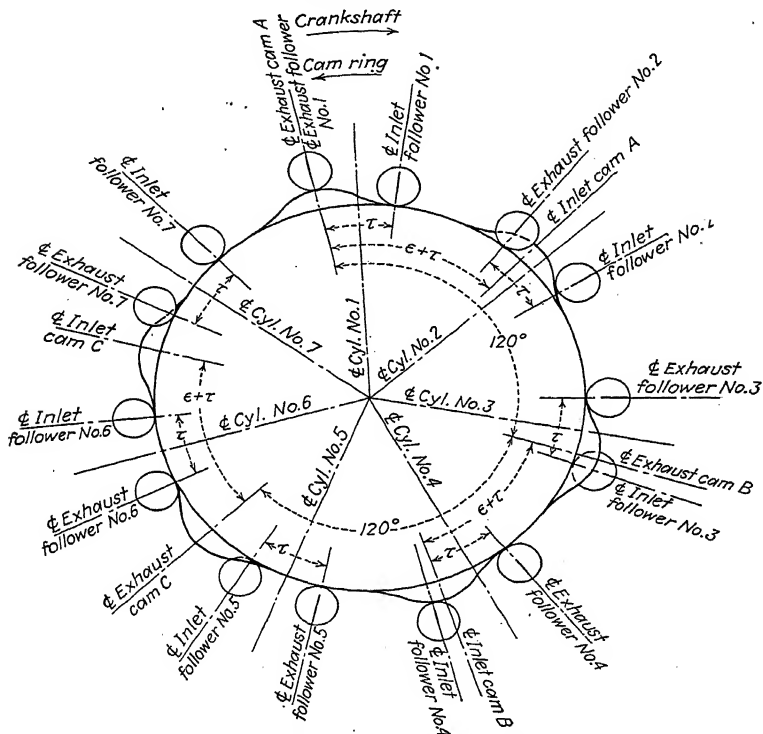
Layout for locating inlet and exhaust cams on radial-engine cam rings.
